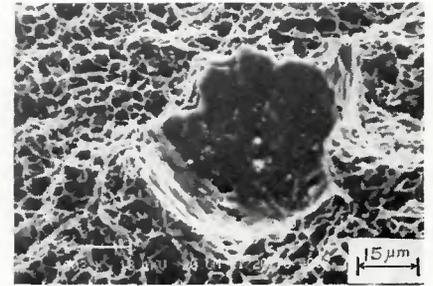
Typical pore of the fracture surface of a DT specimen of a laser weld
